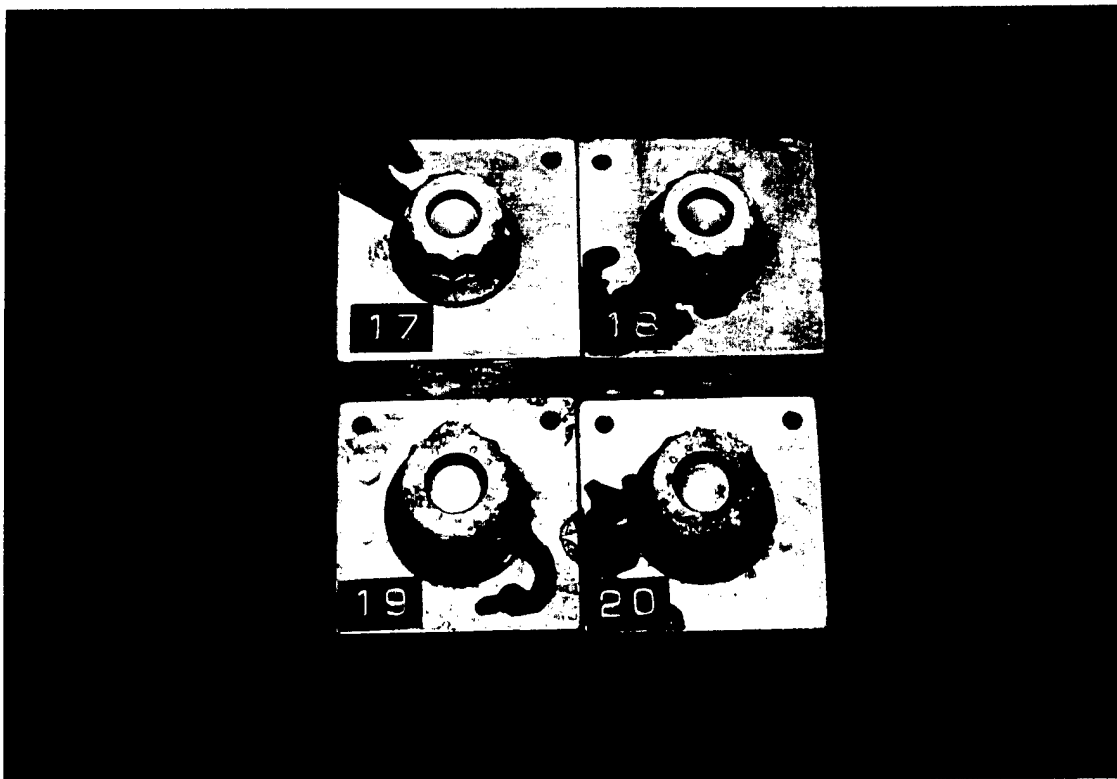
H11 Chromium Hot Work Tool Steel Bolt Heads With IVD Al Coating After 15 Days of Salt Spray. Reduced 25%.
